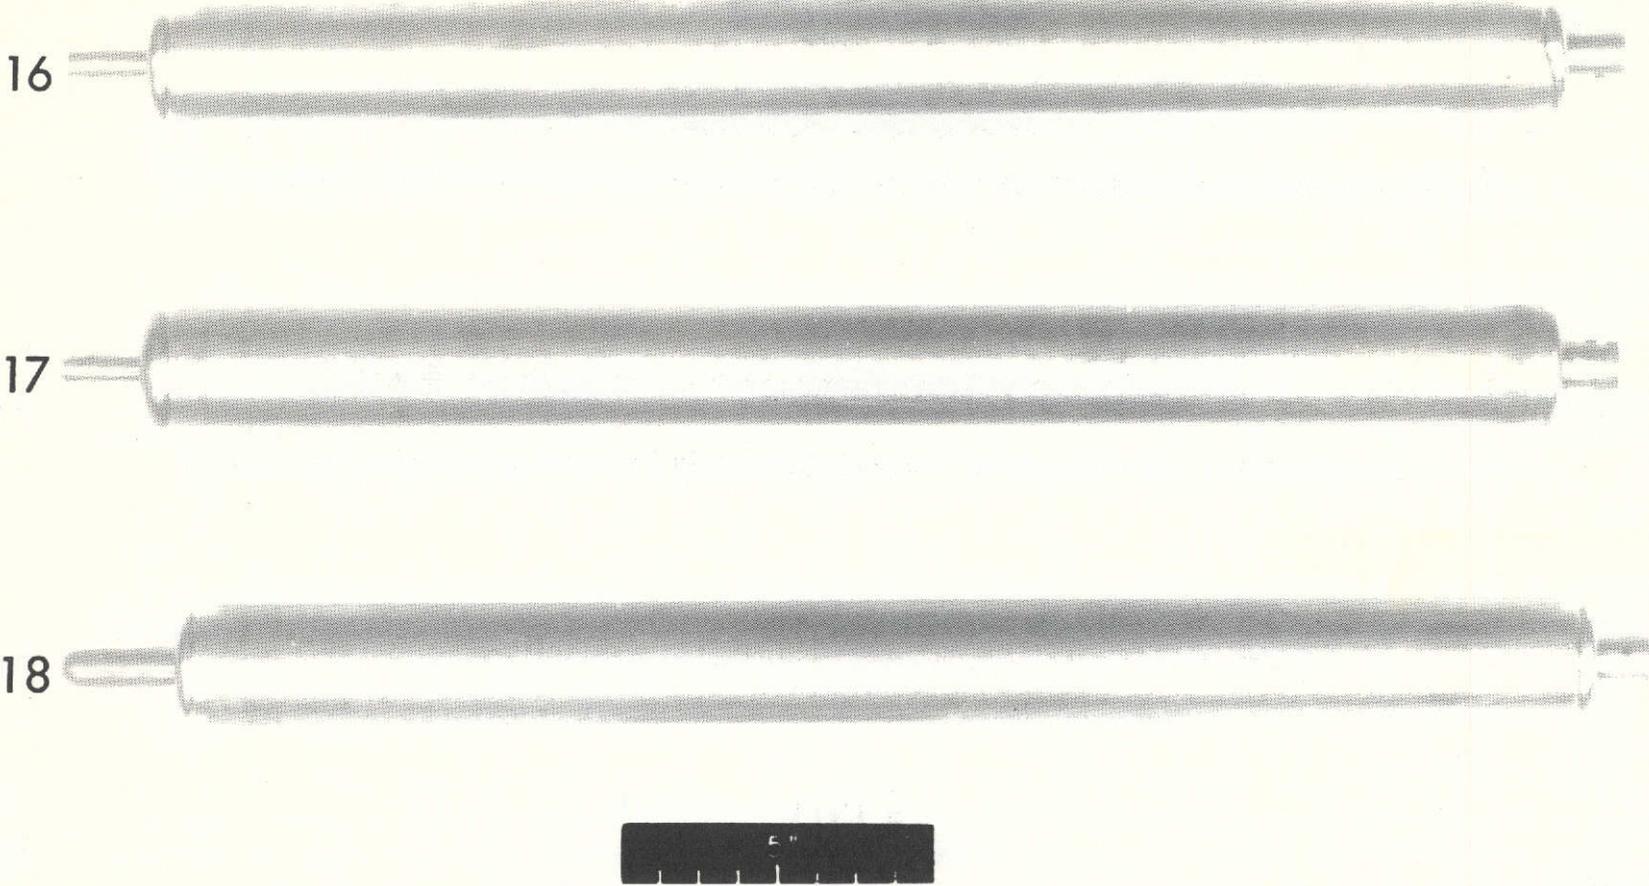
Completed fuel pins ready for installation in capsule UN-6.
